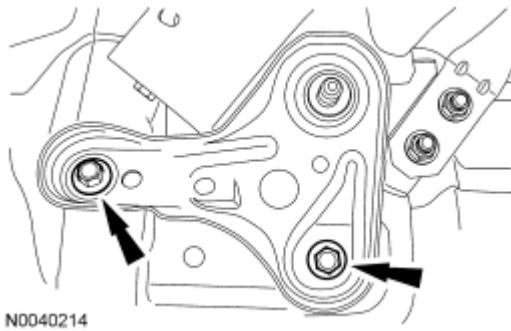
Locating Subframe Brackets And Bolts Finger-Tight
